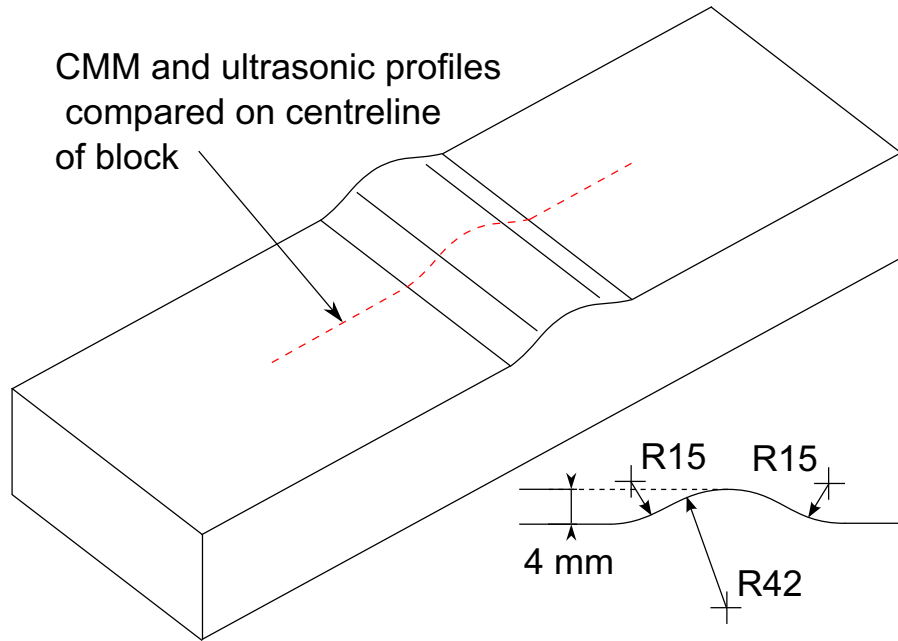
A diagram showing a sketch of the test block with a artificial weld cap. The location on the test piece used for the comparison of ultrasonic and CMM results is shown by the red dashed line. Approximate details of the weld cap geometry are also shown.
